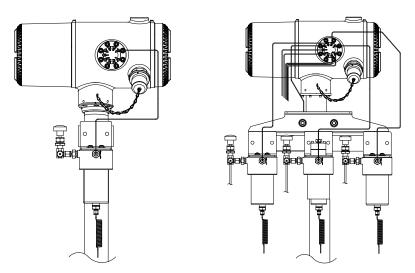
Single and Multiple Stream Sample Conditioning Assemblies
